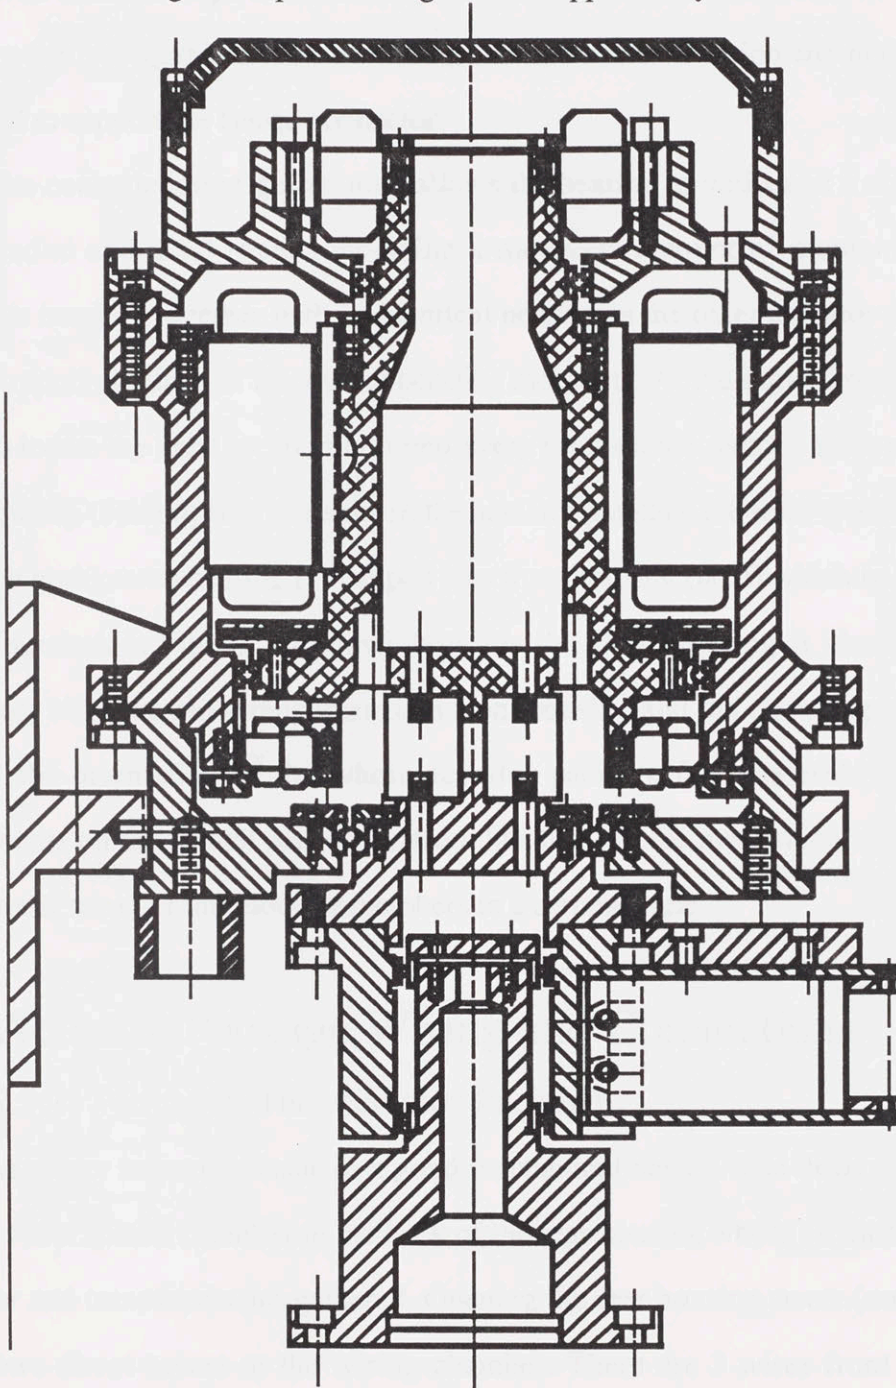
Cross Section of Designed Actuator Package with Shoulder Joint (scale 1:2)
